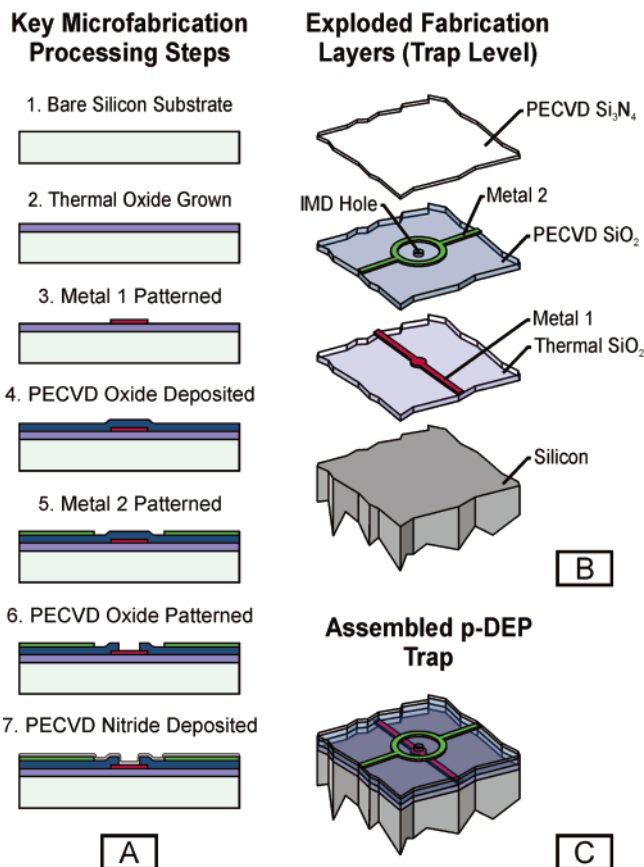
(A) Basic processing steps required for device fabrication. (B) and (C) provide exploded and assembled pictorial images of the distinct material layers in a single DEP trap.
